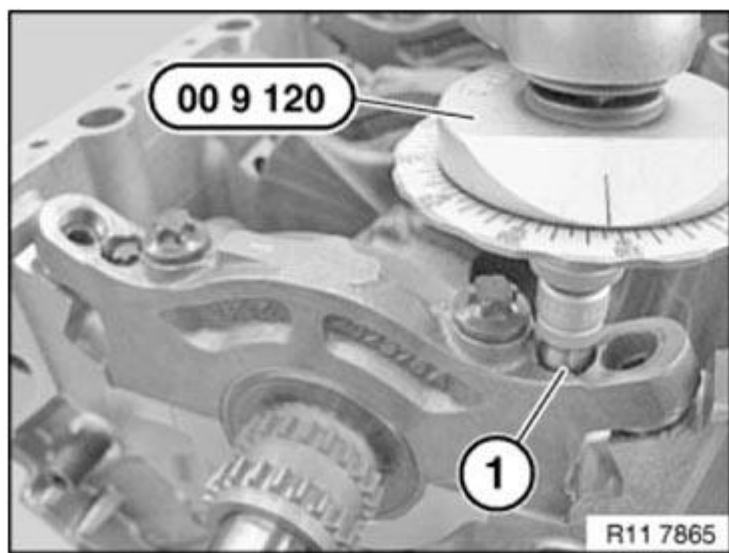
Securing Collar Bolt With Special Tool 00 9 120
